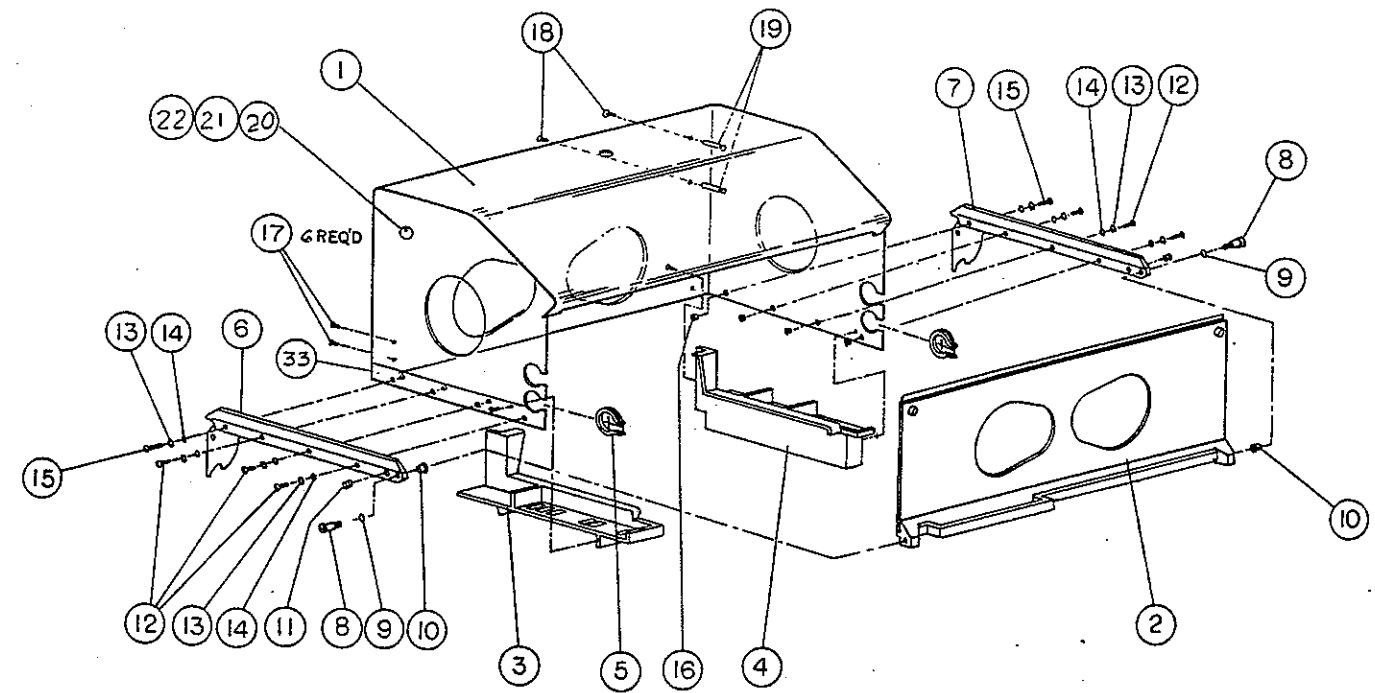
PARTS LOCATION DIAGRAM, HOOD ASSEMBLY
